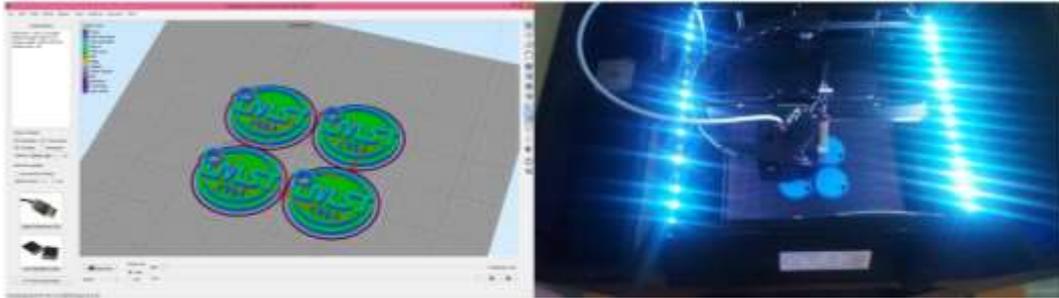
Manufacturing of FDM prototypes on the 3D Kreator machine
